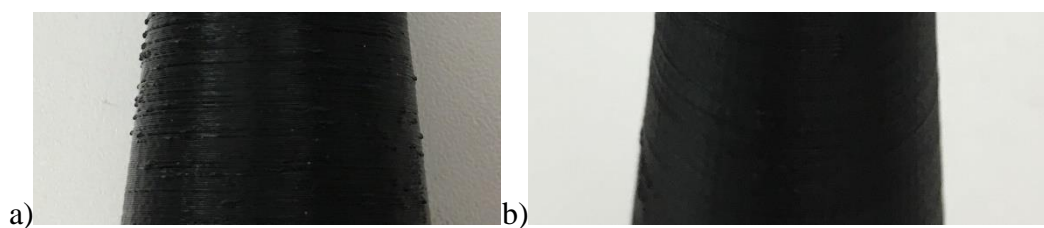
Surfaces and print quality of 3D printed mandrels, a) before 3D printer upgrades, b) after 3D printer upgrades
